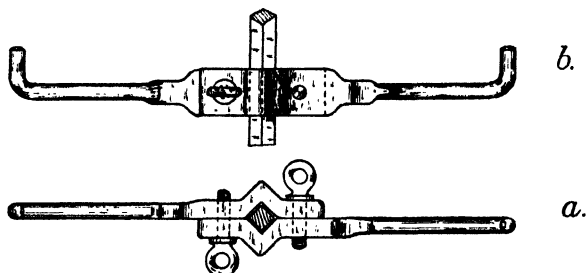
Rod Tiller: (a) Plan; (b) Elevation.
